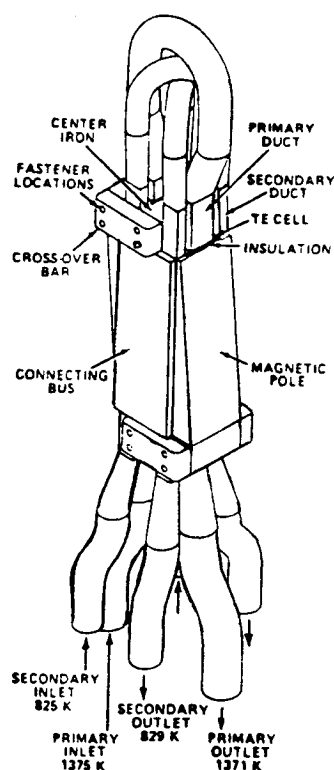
Configuration of the TE-EM pump assembly for the SP-100 system.
